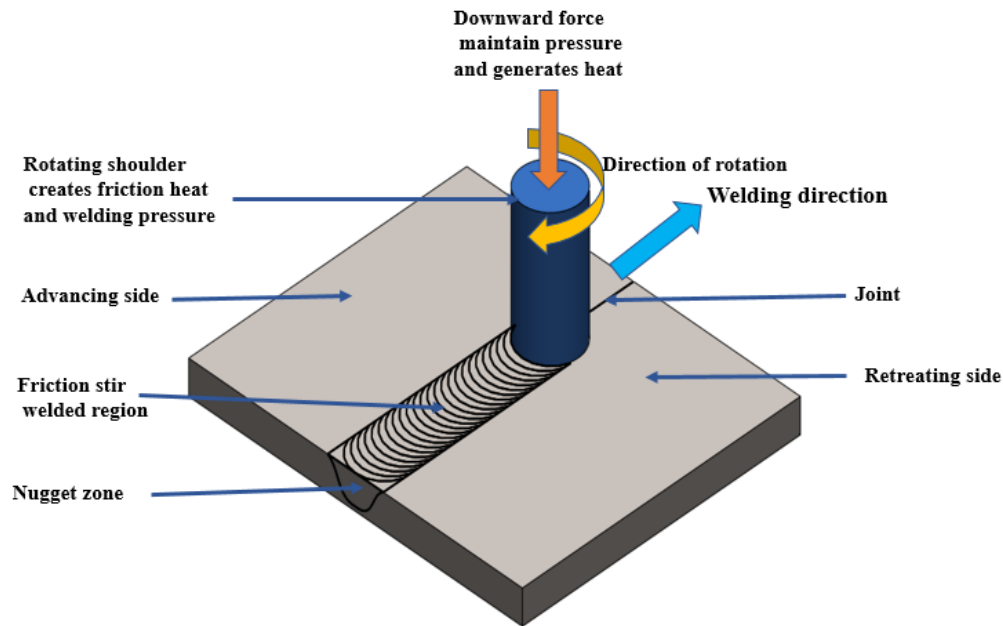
Schematic diagram of friction stir butt welding
